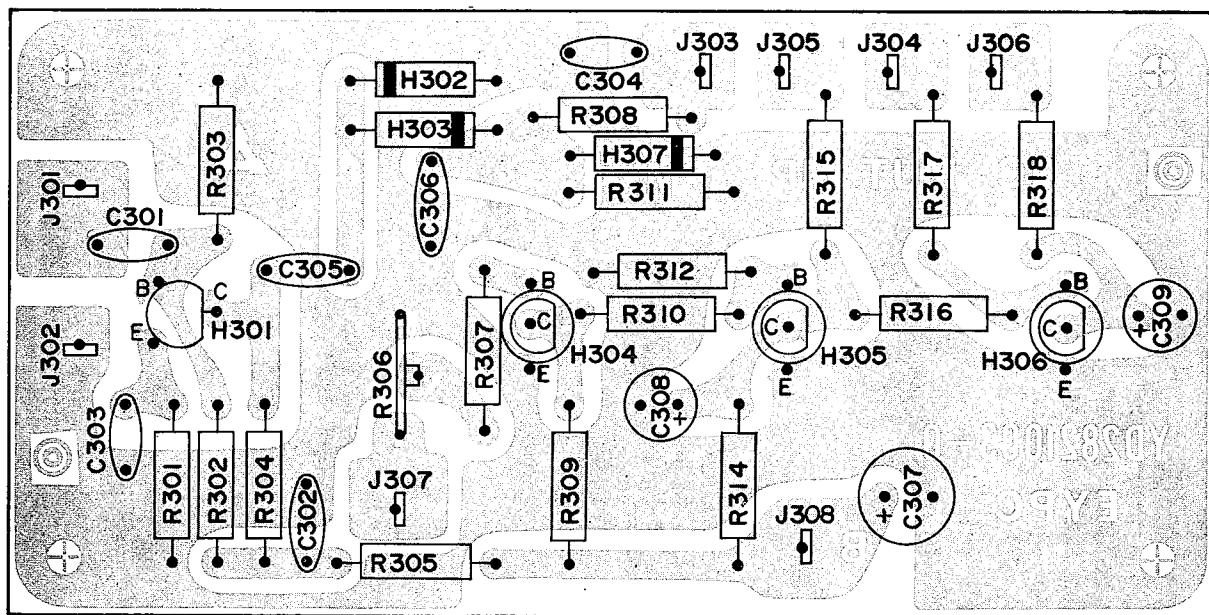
Muting Control and Meter Amplifier Unit Assembly P300 Component Locations
